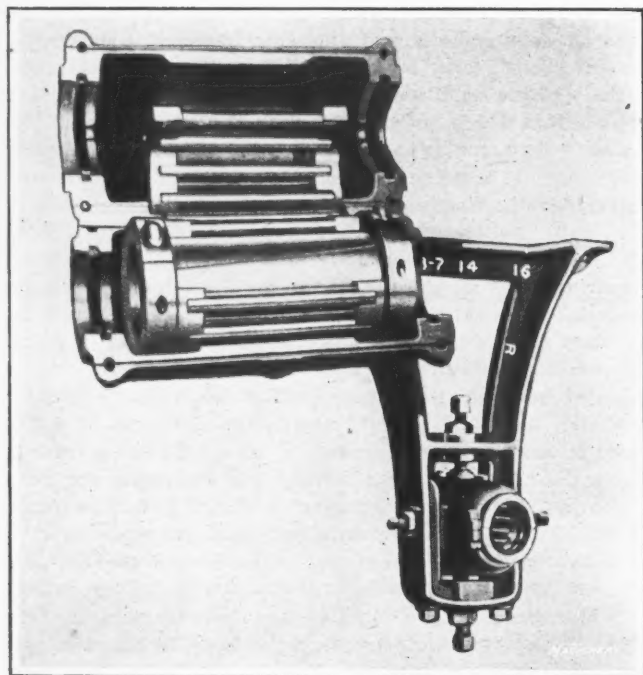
Split Roller Bearing Box and Type of Hanger in which it is mounted way for the rollers; this box is also furnished with reservoirs to carry a supply of lubricant for the bearing and felt packing rings at each end, which prevents the escape of lubricant and excludes grit and other foreign matter from the bearing.
